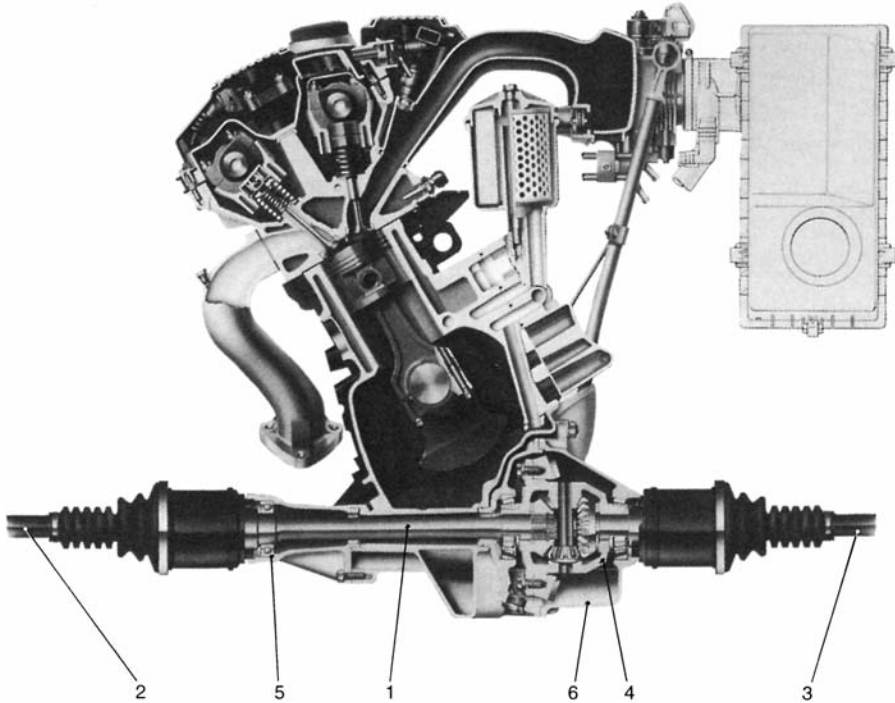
Front cross-section view of the engine; and drive axle of a standard four-wheel drive vehicle (BMW assembly diagram). The basic vehicle has rear-wheel drive and, in order to also be able to drive the front wheels, the front axle power take-off 4 had to be moved into the space of the oil pan. The intermediate shaft 1 bridges the distance to the right inner CV joint and thus ensures drive shafts of equal length to both wheels (items 2 and 3 and Fig. 1.51). Part 1 is mounted on one side in the non-lockable differential 4 and on the other side in the outrigger 5. This, and the casing 6, are screwed to the oil pan.
